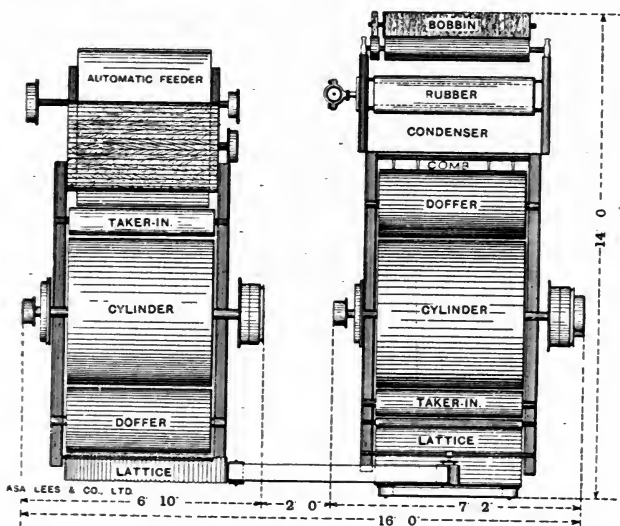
Plan of Breaker and Finisher Cards with Scotch Feed.
